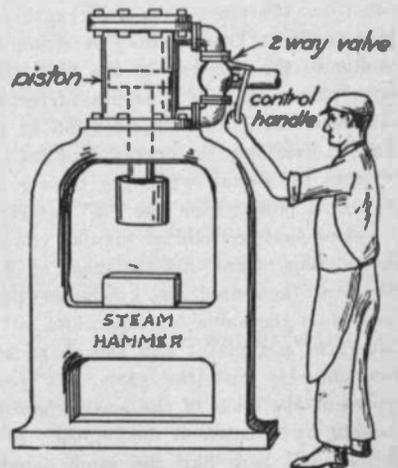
Feed Back on Steam Hammer Like That in Tube
